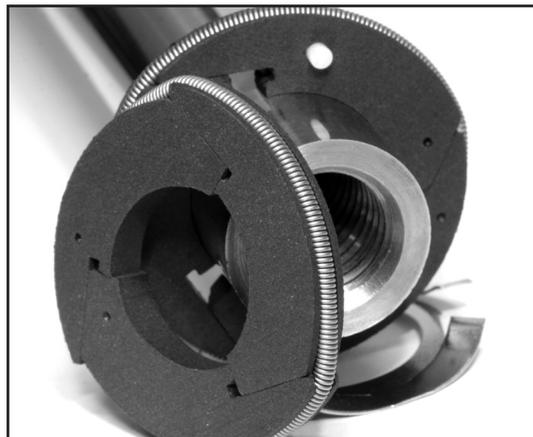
b) T-T packings on piston rod. Springs automatically adjust as packings wear.
